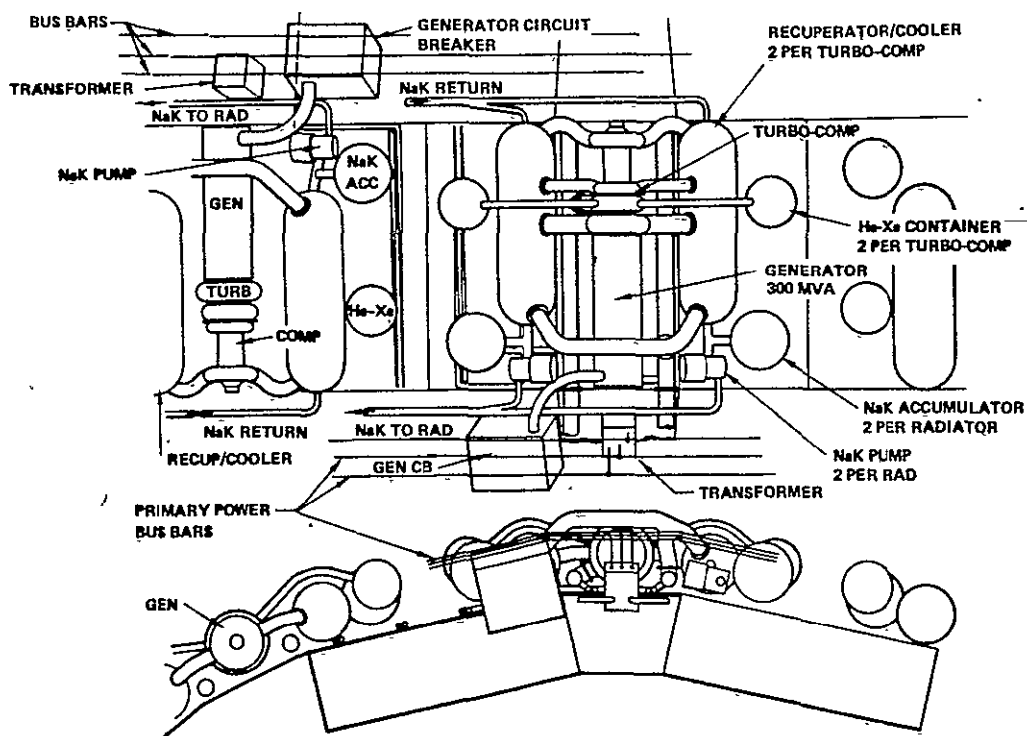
SOLAR BRAYTON CYCLE TURBO-GENERATOR ASSEMBLY CONCEPT
